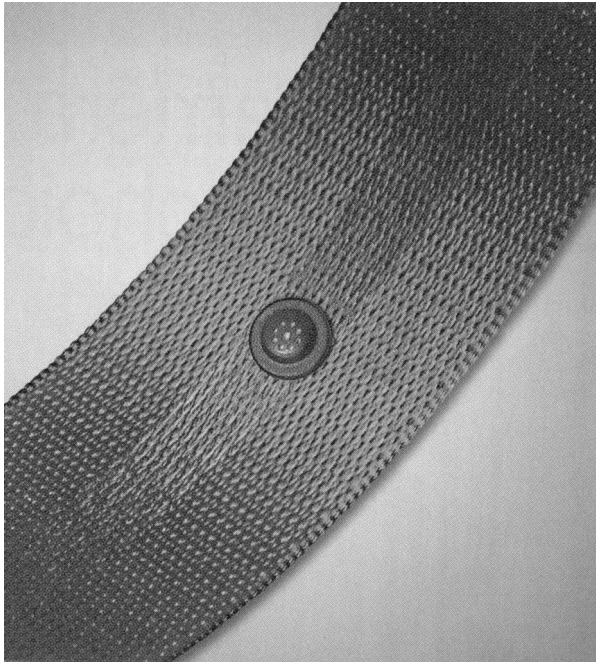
Laser welding of a microphone “button” to an automobile seat belt without damage to either
